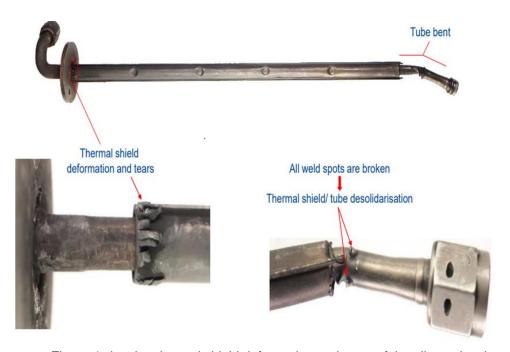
showing thermal shield deformation and tears of the oil supply tube
